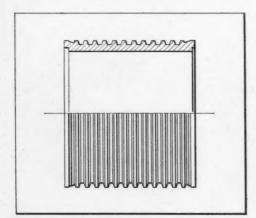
The annular cooling fins on the periphery of this hollow cylindrical housing were machined on a lathe with the special rotary tool-post shown in Fig. 2
